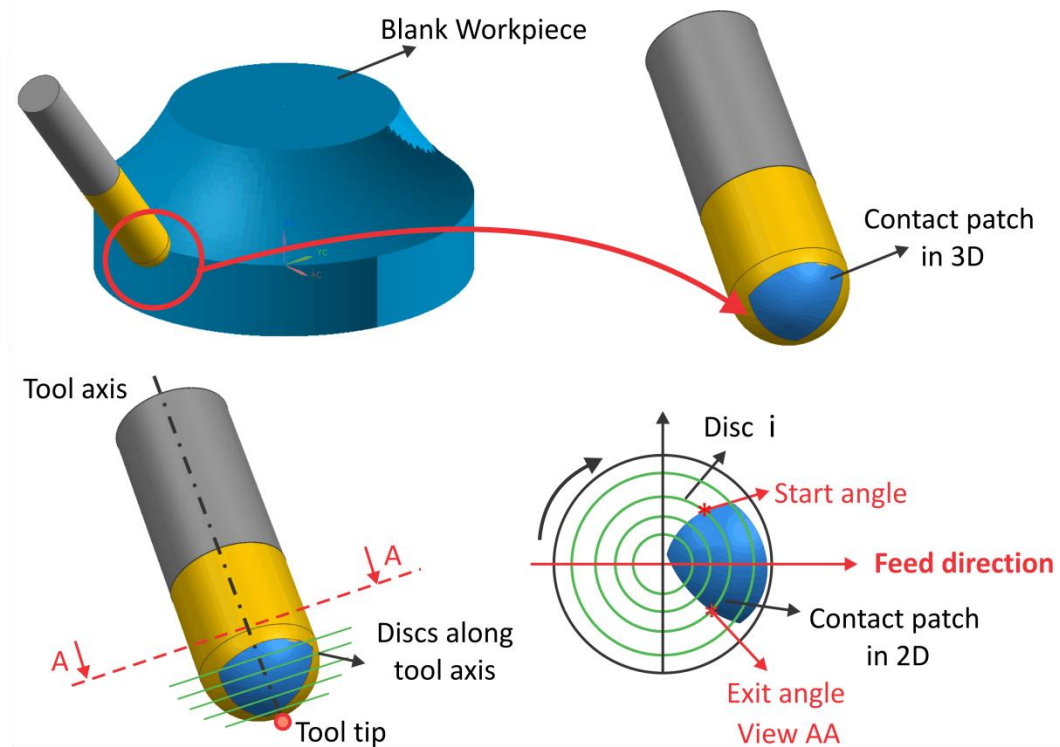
Cutter-workpiece engagement geometry extraction for ball-end mill
